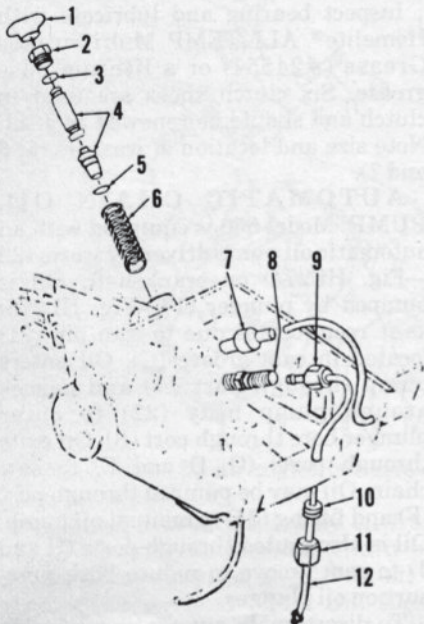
Exploded view of manual oil pump used on model 650. End of oil line (12) is connected to fitting (24—Fig. HL276). Oil line (12) must be disconnected from fitting and pulled into air box for removal.
